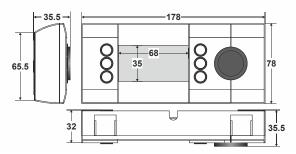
Dimensions of CLEAHMI21 (in mm)
